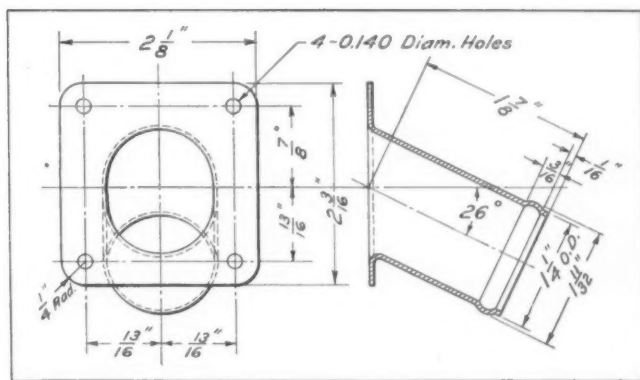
Details of Radiator Inlet Pipe Made from 18-gage Sheet Brass
